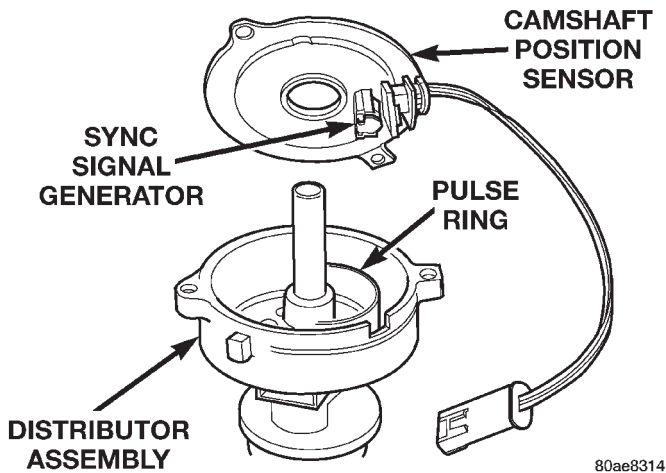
Distributor and Camshaft Position Sensor—Typical
